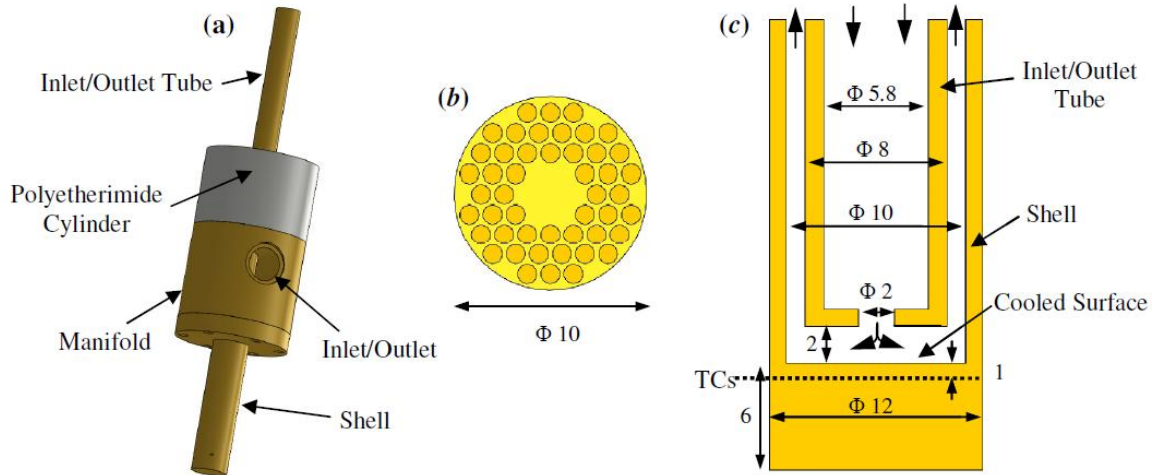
A solid model of the test module used in the experiments (a), a diagram of the pin fin array (b), and a cross section of the finger without fins (c). All dimensions in mm
